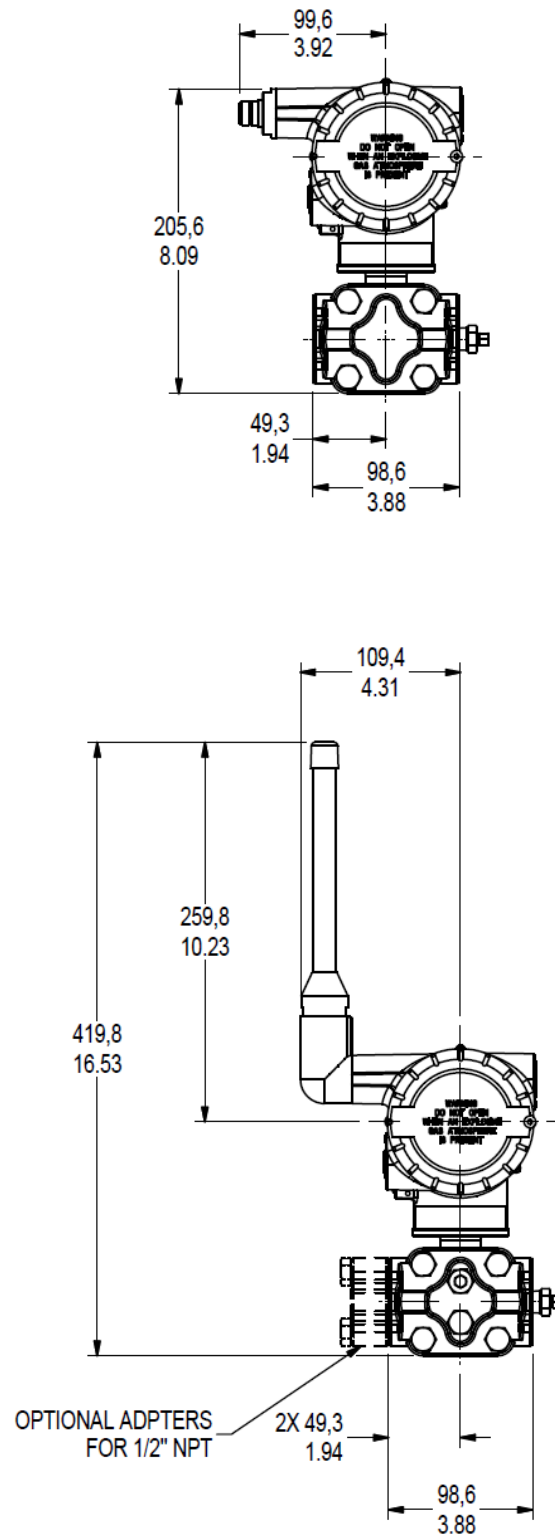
DP/DHGP Pressure antenna dimensions unit mm/inch
